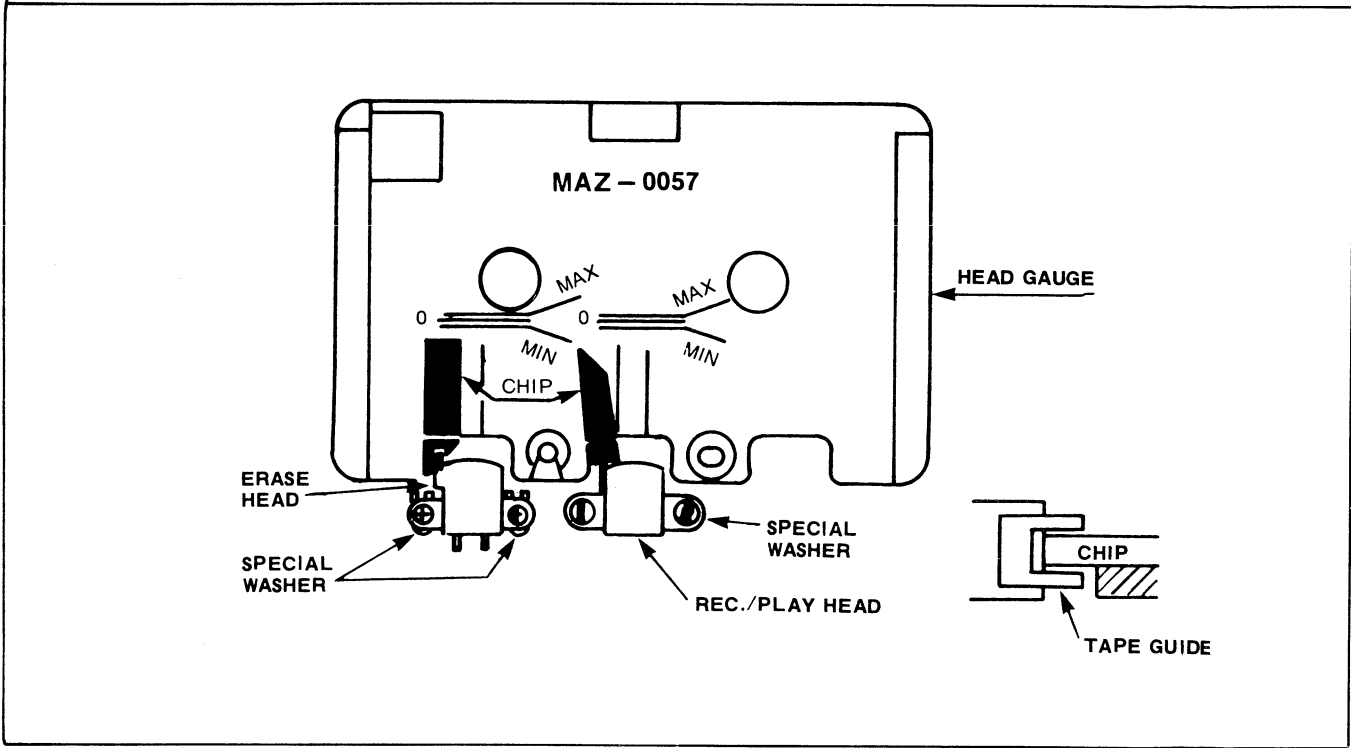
Figure AW. Head Height Adjustment for the Play/Record Head and Erase Head
